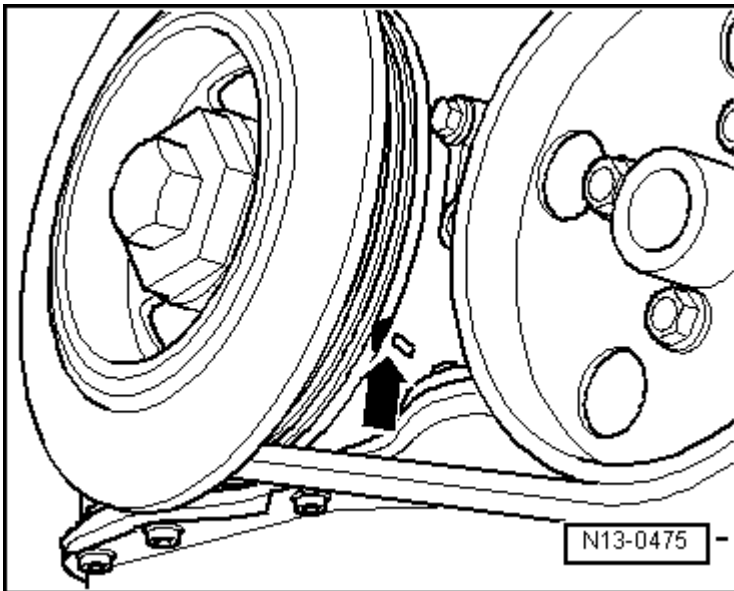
Identifying Crankshaft At Vibration Damper Securing Bolt In Engine At TDC Cyl. 1
